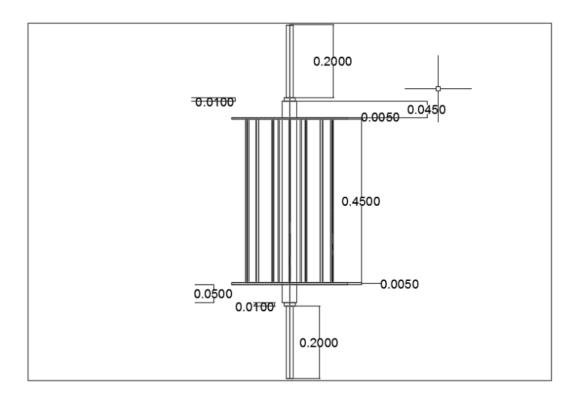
Draft 2 of Cross-Flow Turbine-Side View (using AutoCAD)
